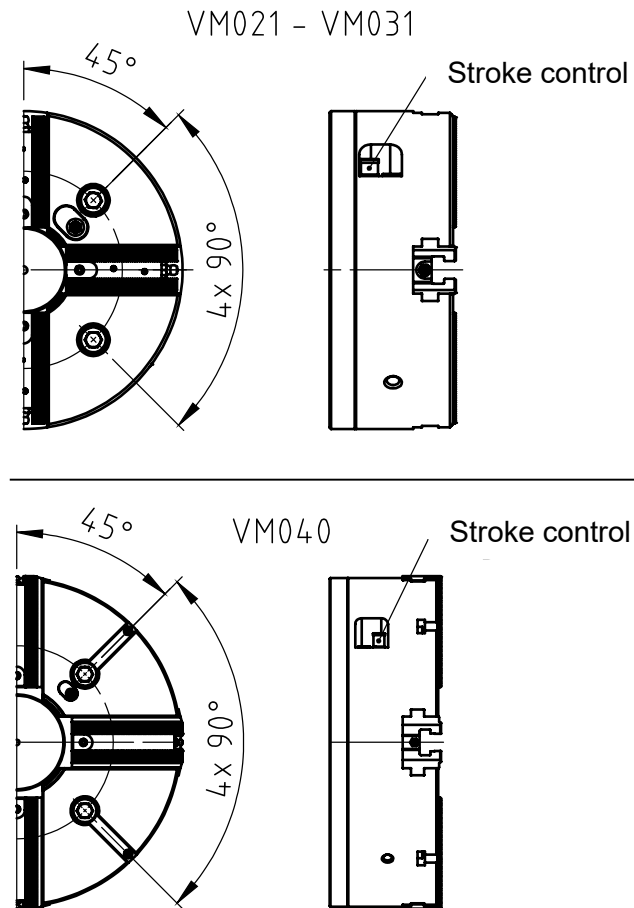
Mounting dimensions VM021 – VM040 [Subject to technical change]
